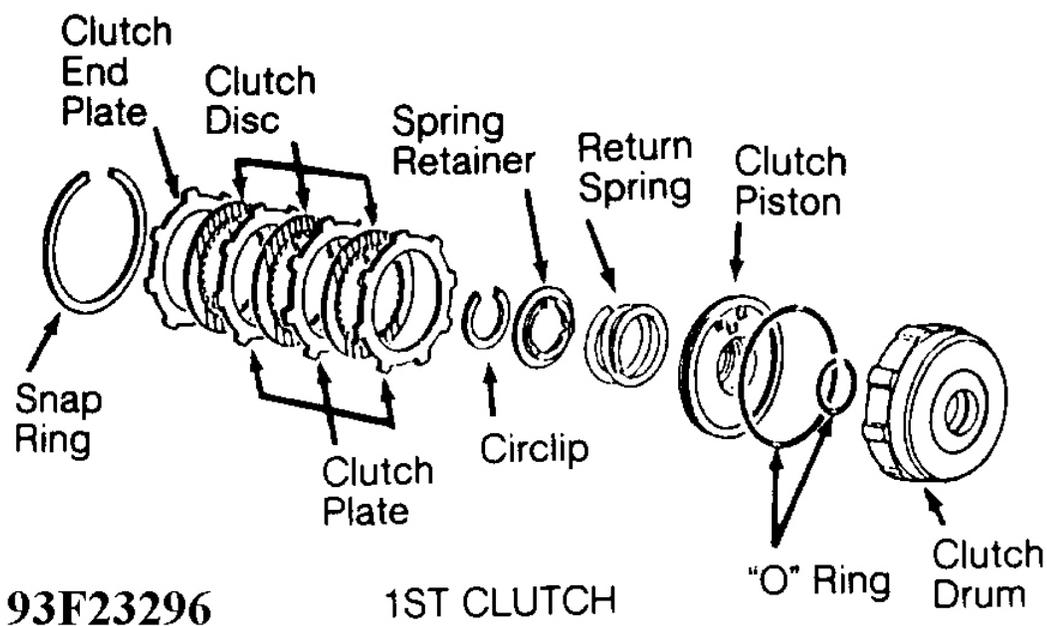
Exploded View Of Clutch Assemblies (1 of 3)
